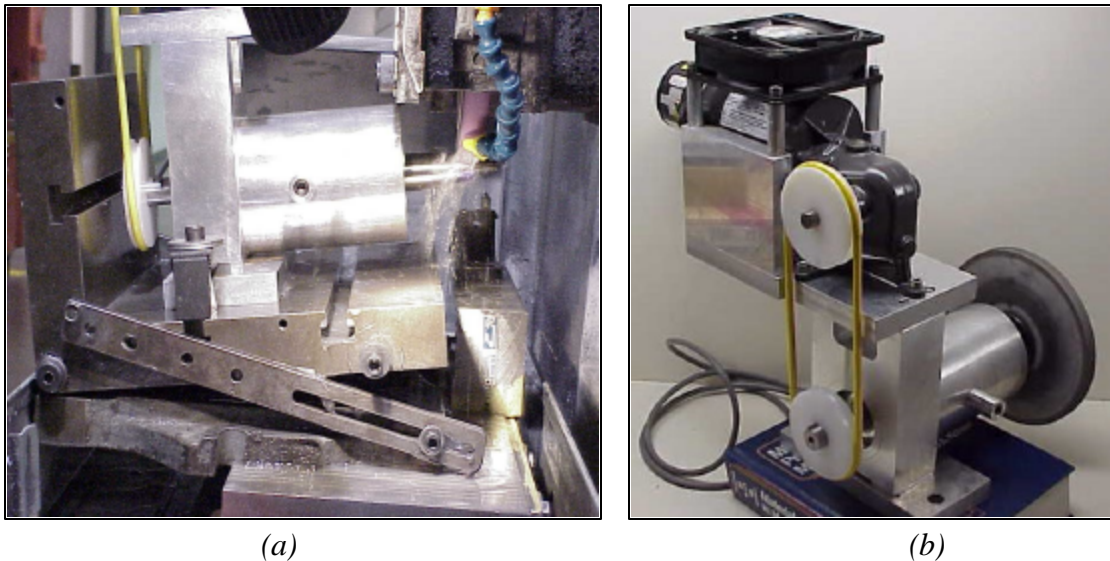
(a) setup for grinding hub mount taper (b) completed spindle
